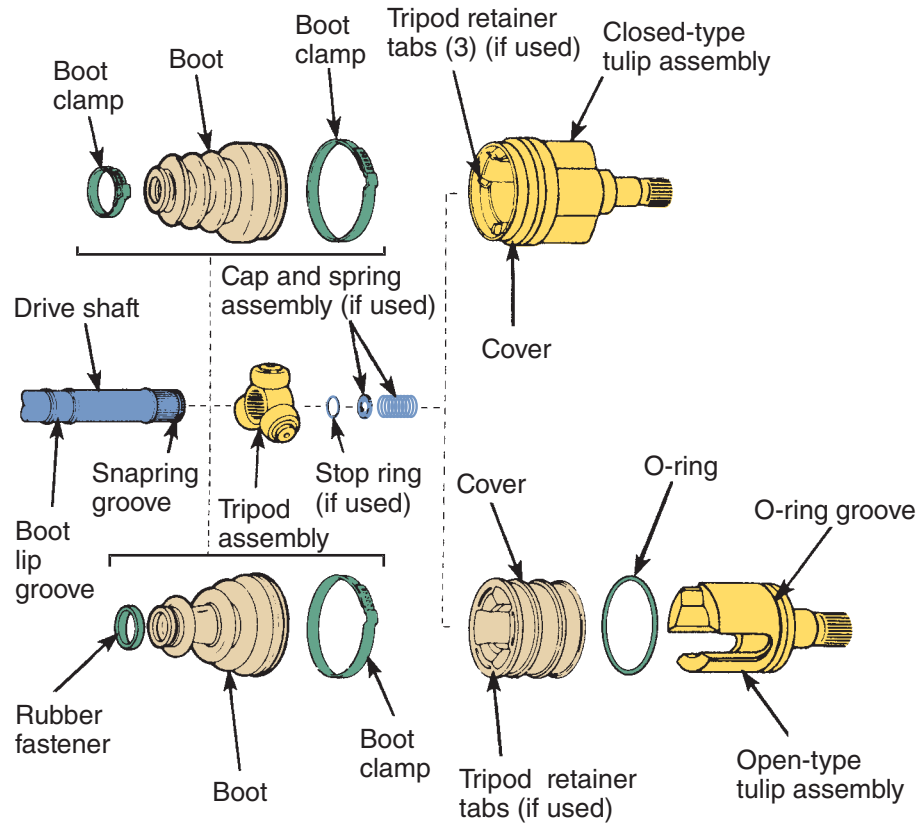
Inner tripod plunge-type joints: closed housing and open housing.
